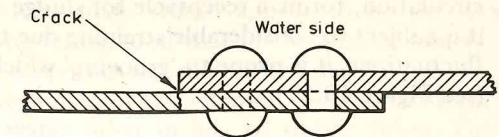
Cracking of shell plate in way of top riveted seam
